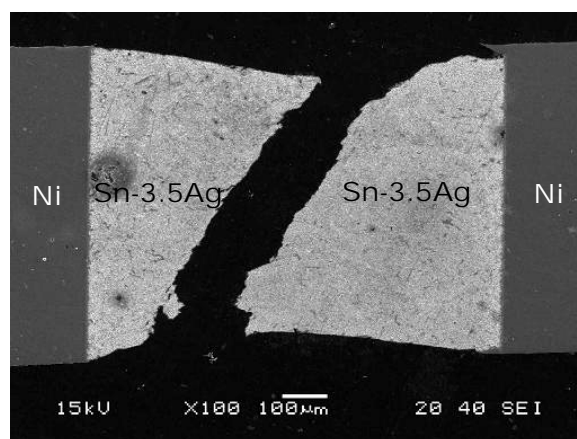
Fracture in the Ni/Sn-3.5Ag solder joint aged at 160 °C for 100 h without current showing ductile failure inside the bulk solder.
